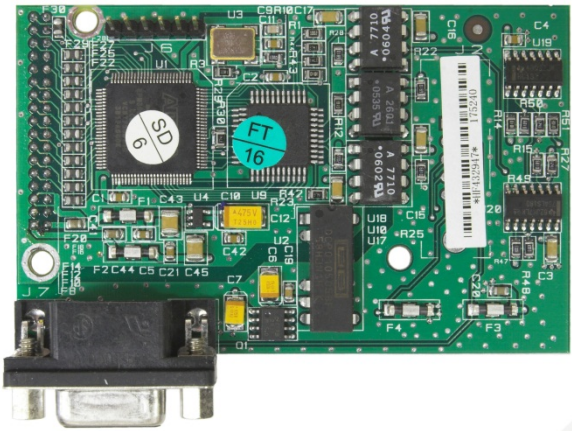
PROFIBUS Option Board, Panel Mount Enclosure
